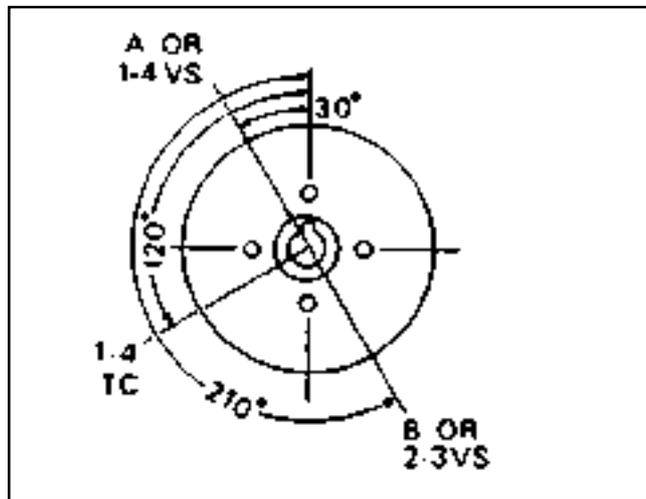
N-495/NT-495 Engine Accessory drive pulley markings
